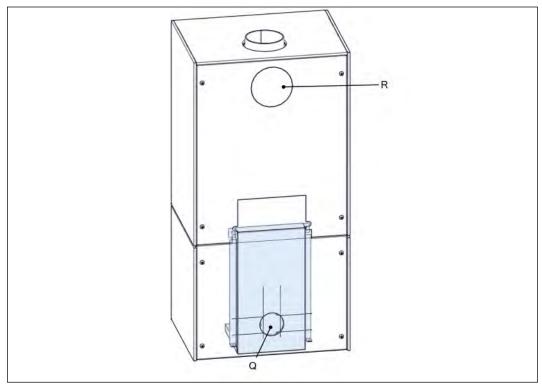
Front view of the BOX 20 40 with wood log storage module and steel frame door
